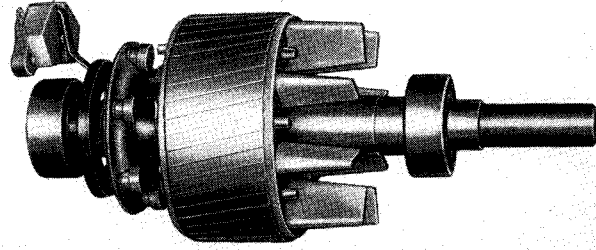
Complete Rotor with Governor Mechanism of the Centrifugal Switch in Place and Contact Assembly in Relative Position
